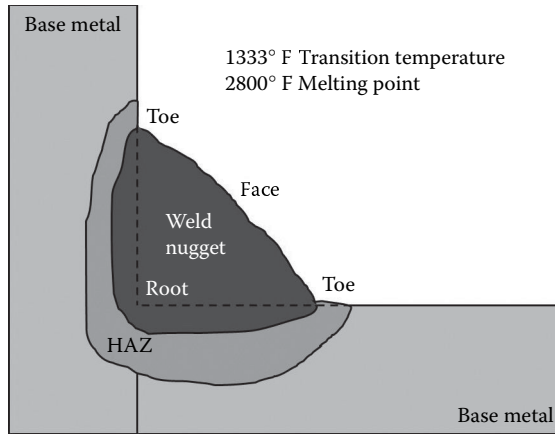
Profile for a fillet weld on a corner joint.
